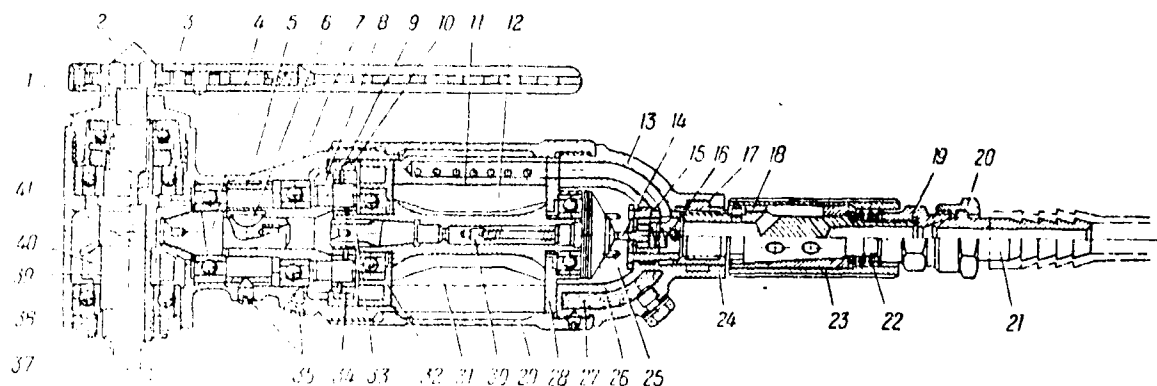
The SPU-23 Pneumatic Angular Drill: 1 - cover of head; 2 - tool post; 3 - ratchet wrench; 4 - bevel gear; 5 - bushing; 6 - key; 7 - frame head; 8 - guide; 9 - pin; 10 - crown gear; 11 - stator; 12 - rotor blade; 13 - housing head; 14 - slide valve; 15 - bushing of slide valve; 16 - spring; 17 - bushing; 18 - conical bushing; 19 - connecting piece; 20 - coupling nut; 21 - nipple (adapter); 22 - spiral spring; 23 - clutch; 24 - bypass pin (stud); 25 - pin; 26 - cap; 27 - lubrication chamber filled with wool wadding soaked with spindle oil; 28 - rear motor cover; 29 - housing sleeve; 30 - special nut with spring; 31 - rotor; 32 - front motor cover; 33 - central gear; 34 - satellite (intermediate) gear; 35 - screws; 36 - drill; 37 - nut; 38 - ring; 39 - shaft; 40 - bevel gear; and 41 - spline (key).
